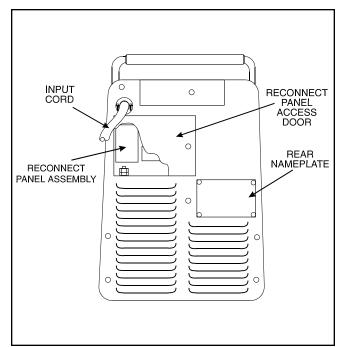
Case Back Assembly: Input Power Cable Entry Connections.
